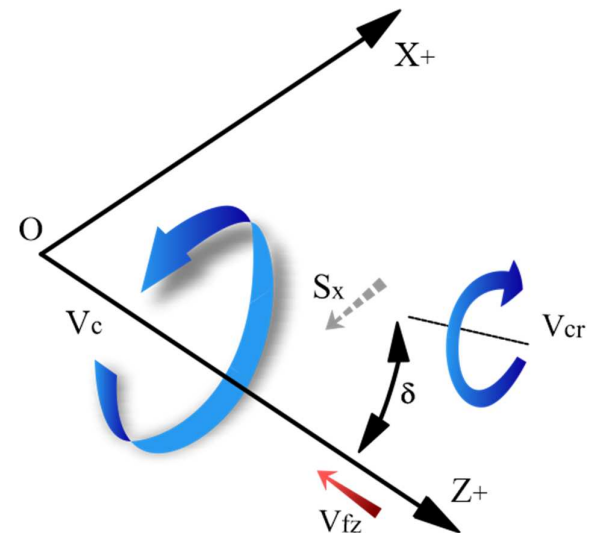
Unconventional cutting scheme implemented on a CNC lathe machine
